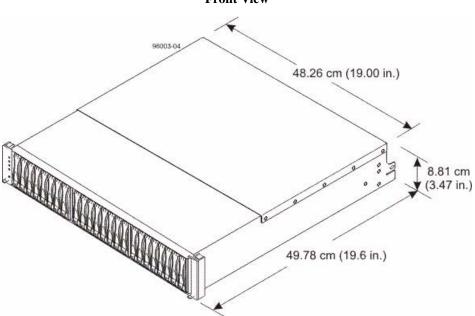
Dimensions of the E5400 Controller-Drive Tray (24-Drive Model) – Front View
